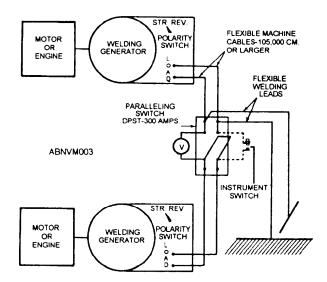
Paralleling connection for a single-operator welding generator.
